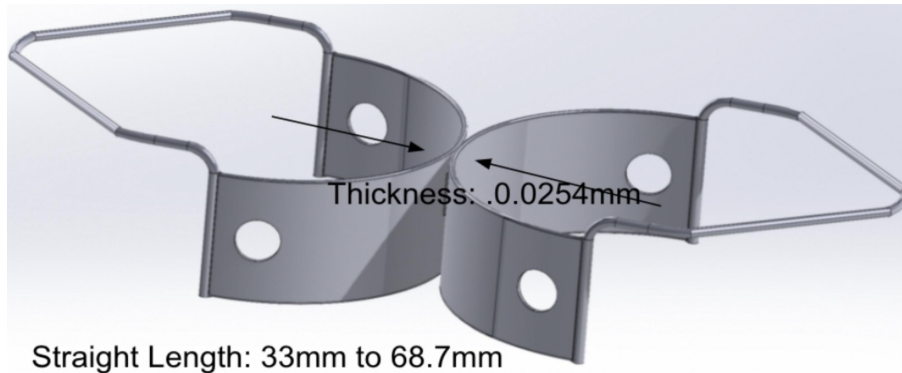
Butterfly + U Pinchers Design Solidworks 3D Model. Similar to the butterfly design, the device consists of two sectional matrix bands with the addition of U Pinchers. Holes added to aid in the removal of the device. Not shown in figure: spring clamp.
